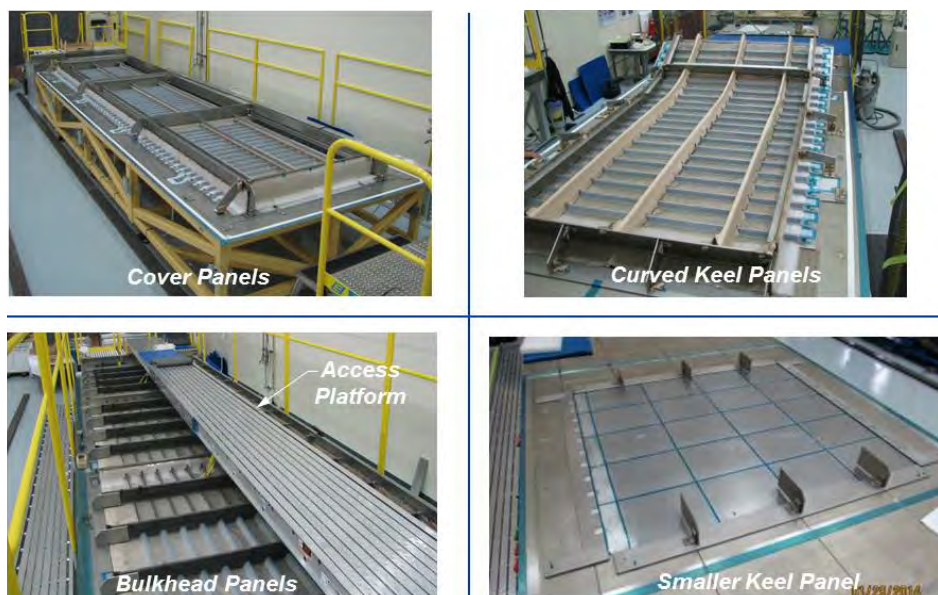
IML Tooling Details Assembled Onto Preform
